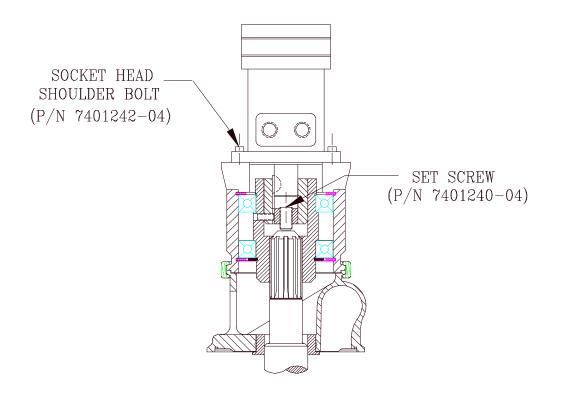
Readjusting The Rotor Stop On A CONTHERM With A Hydraulic Drive
